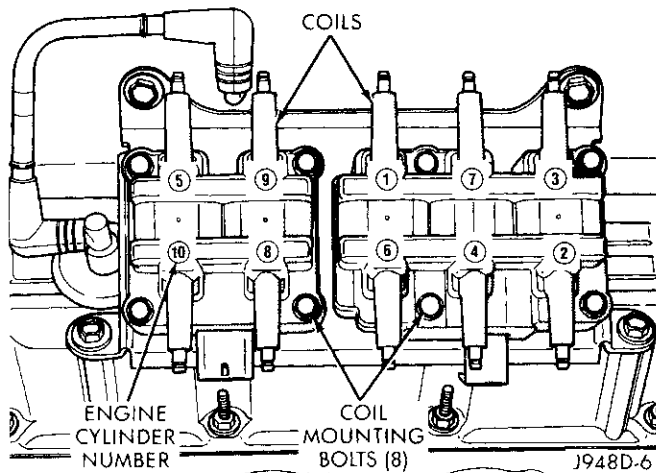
Ignition Coil Packs—8.0L V-10 Engine
